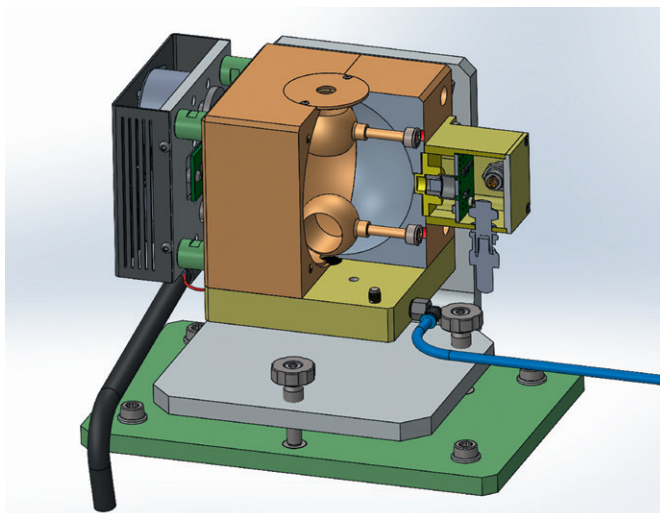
Cross-section view of the IRIS21 instrument-head showing the shutter blades and sensor.
